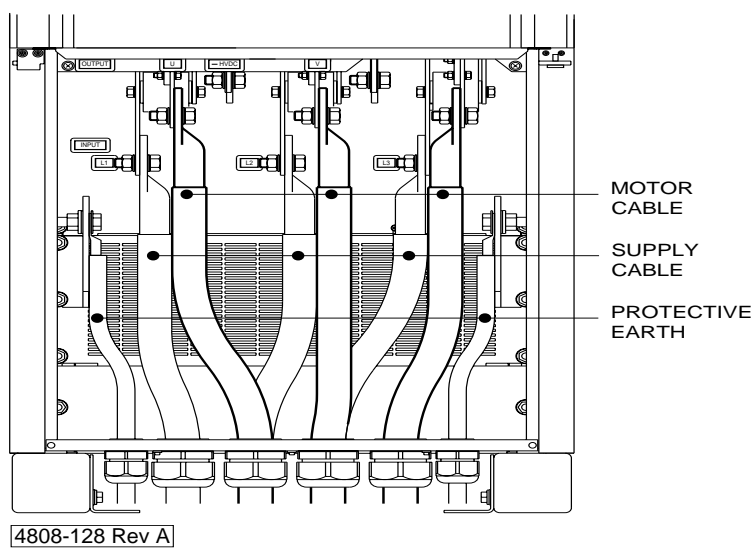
Ultradrive E-Series Frame 5 Screened Motor Cable Configuration
